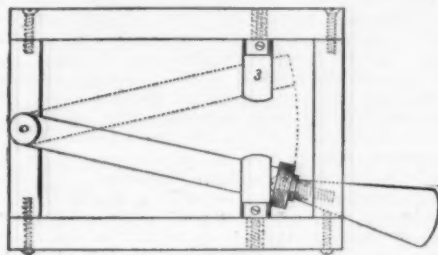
SIDE ELEVATION OF AERIAL SWITCH.
